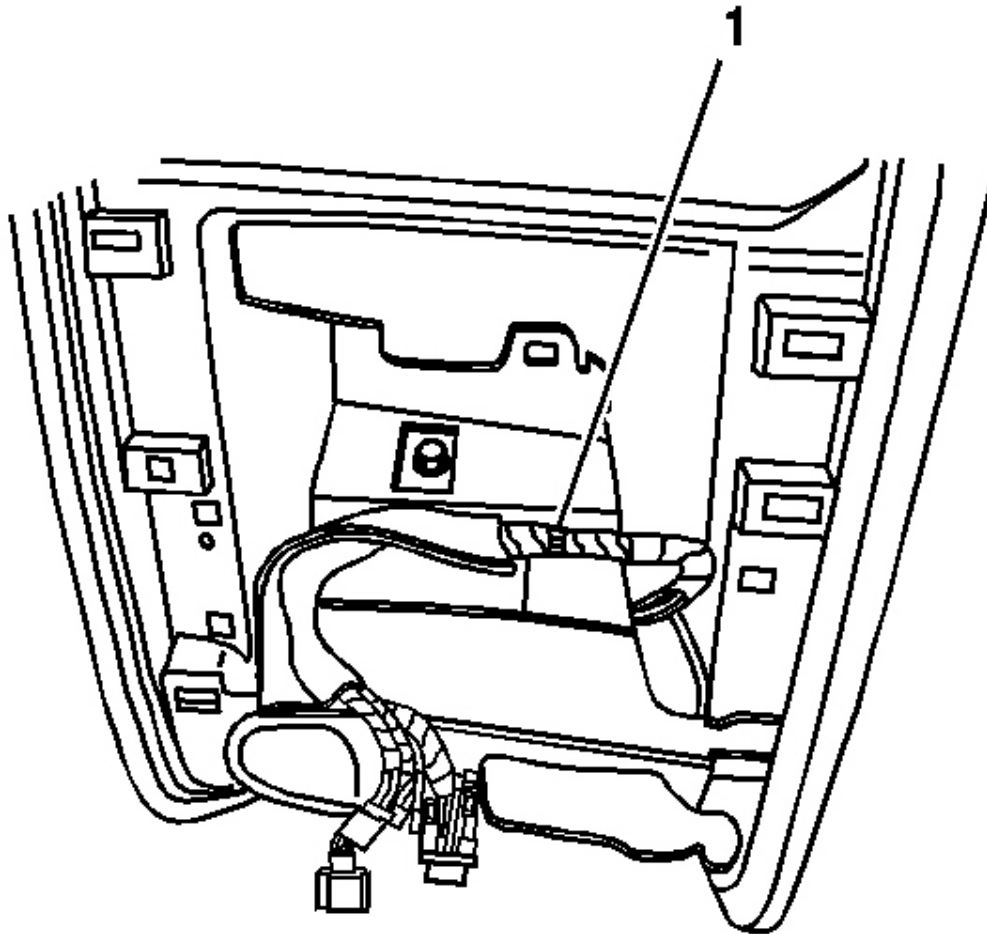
View Of Left Side HVAC Floor Air Outlet Duct
